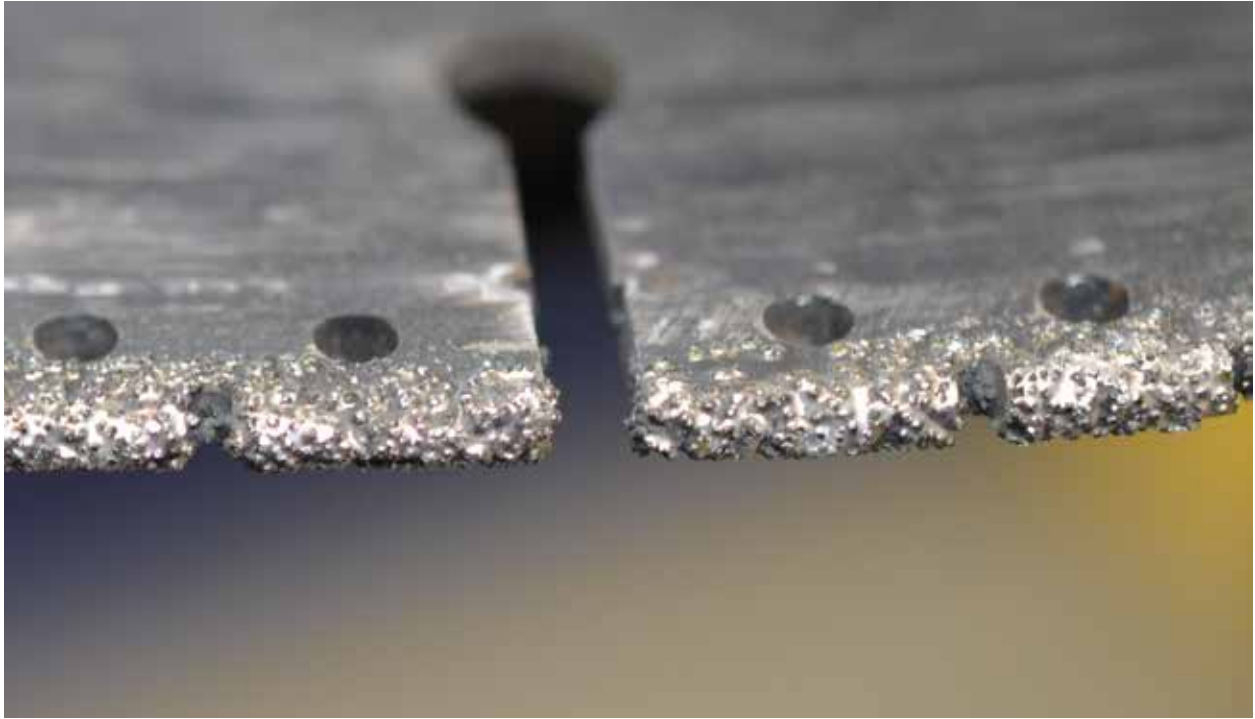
Diamond Saw Blade, CF24, Wet Cuts
